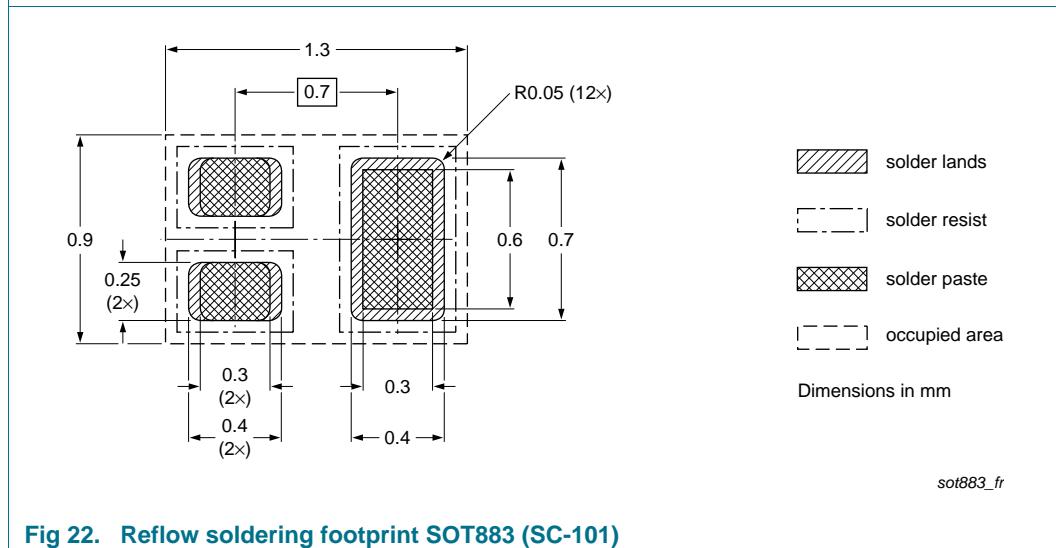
Reflow soldering footprint SOT883 (SC-101)
